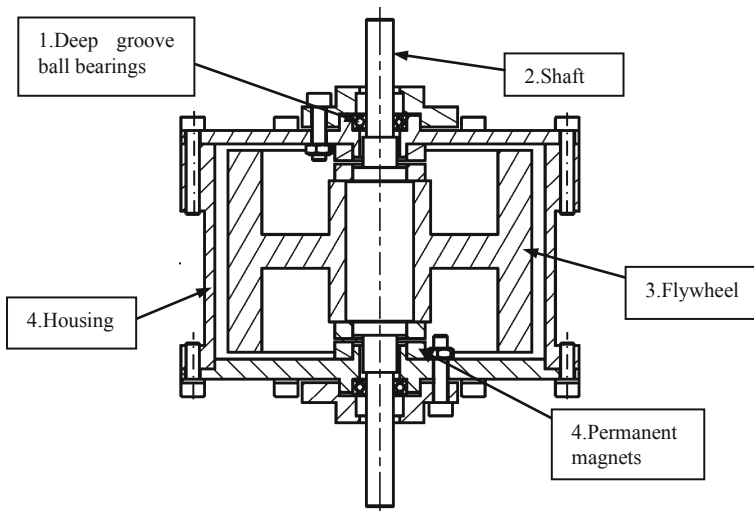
Section of a flywheel supported on permanent magnetic bearings
